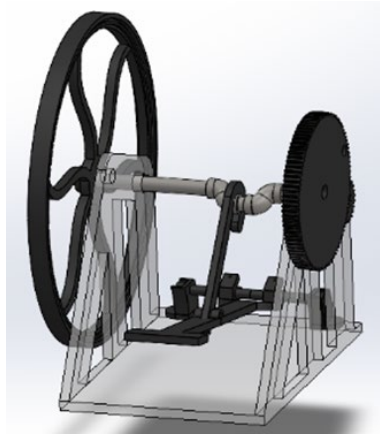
Student-created computer aided design 3-D rendering of the drive system of the 1885 Chandler & Price printing press, which includes the treadle, treadle hook, crankshaft, flywheel, and shaft gear. This figure was created by the senior design group during EGR 498 in Fall 2025 for their final report and presentation and is shared with permission.
